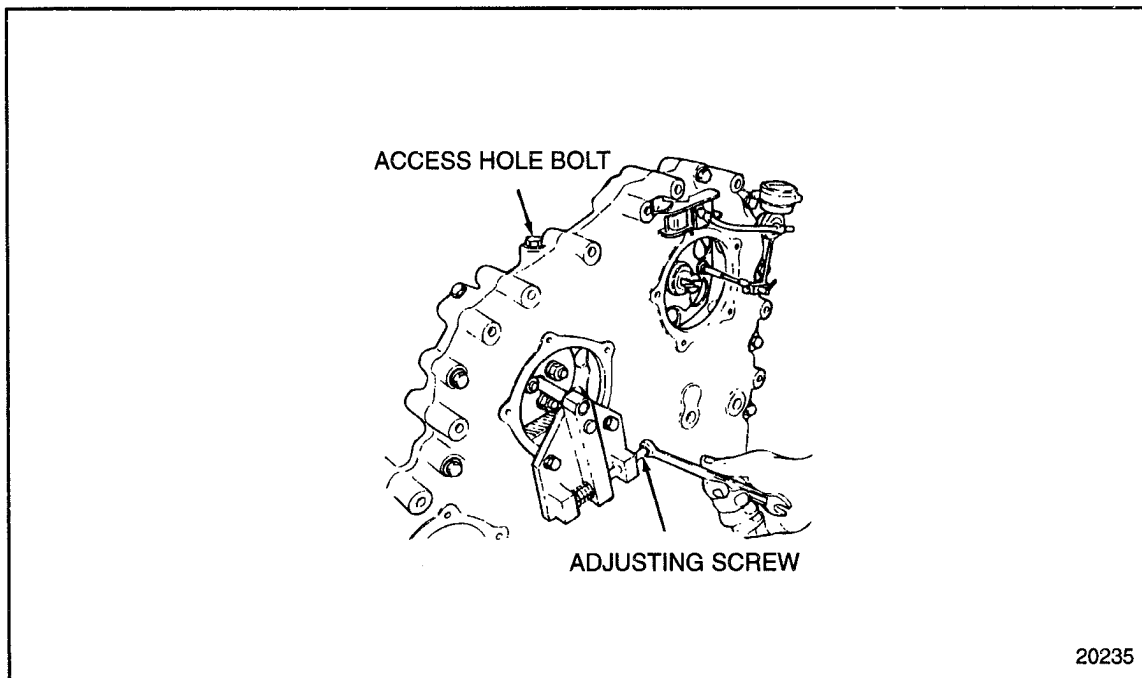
Adjustable Idler Gear-to-Camshaft Drive Gear Lash Adjustment
